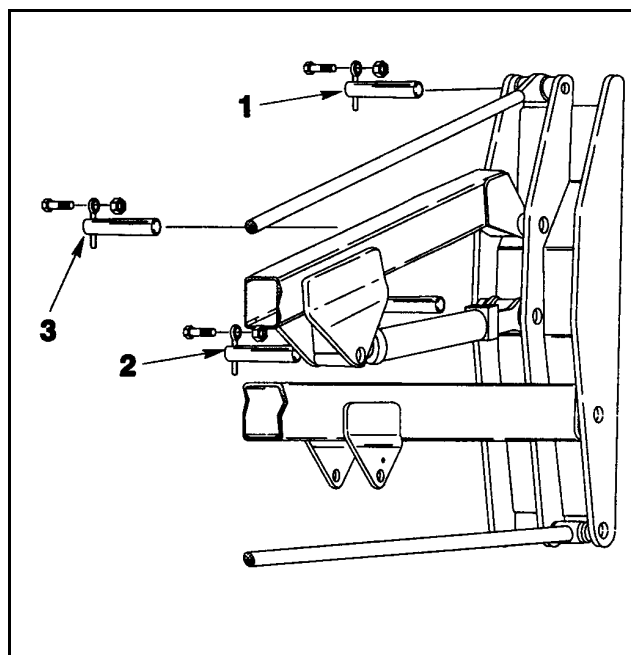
Location of Components - Removal of Base Boom. (Model 30)
